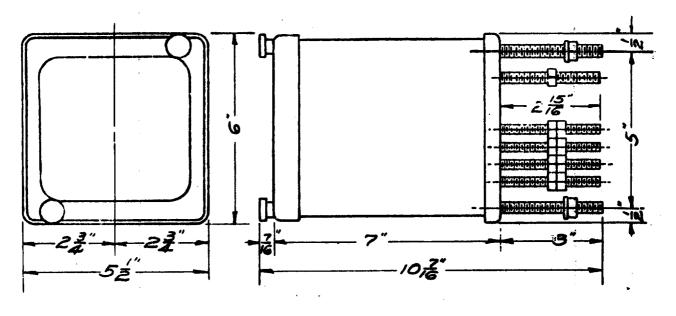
OUTLINE & PANEL DRILLING FOR DRAWOUT CASE. ONE-UNIT, SINGLE-END. (K- 6174671)
